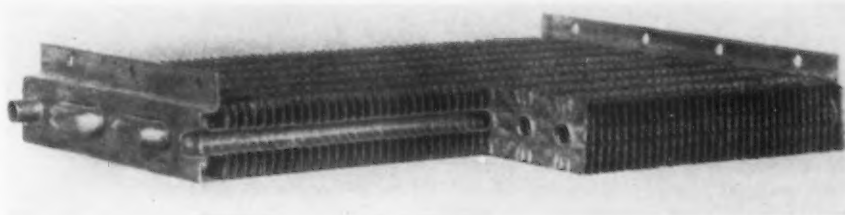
Steel-fin condensing unit made up of cupped fins telescoped together. This assembly has 729 joints, all copper brazed in a single trip through a continuous furnace.
